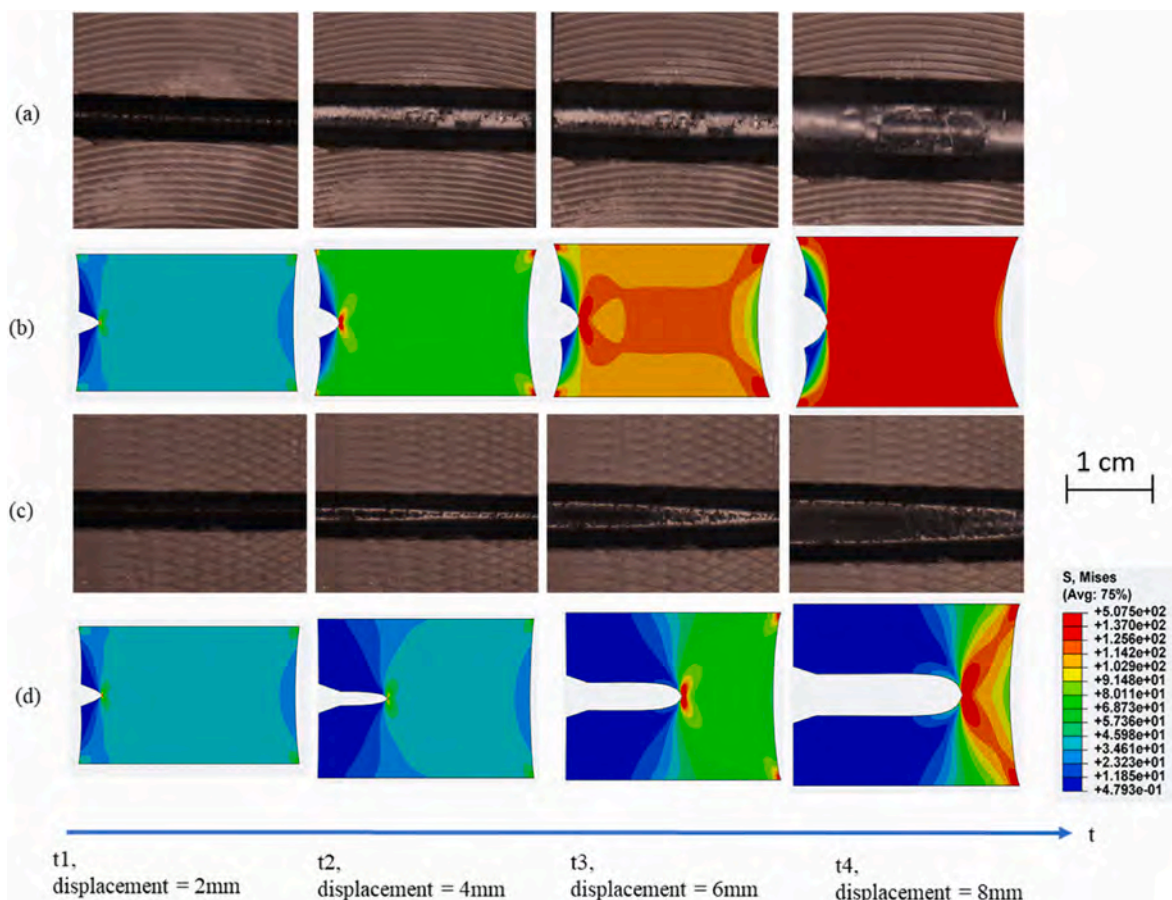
The fracture process of the specimens for non-welded and welded specimens. (a) frontal view of non-welded specimen (b) lateral view of non-welded specimen (c) frontal view of welded specimen. (d) Lateral view of welded specimen.
